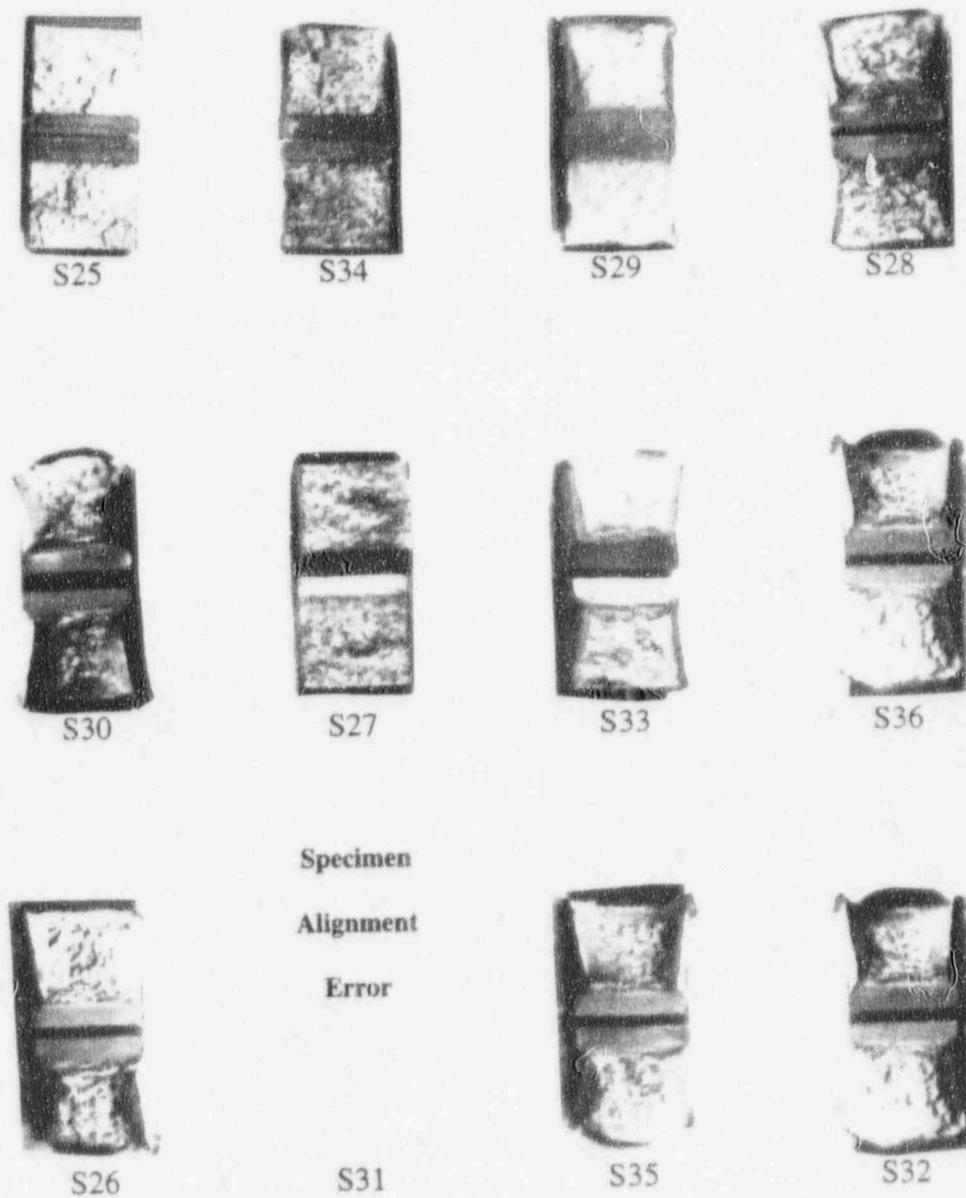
Charpy Impact Specimen Fracture Surfaces of the Prairie Island Unit 1 Reactor Vessel Intermediate Shell Forging C (Axial Orientation)
